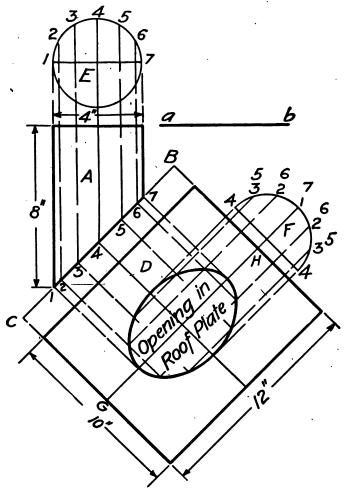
Method of Obtaining Pattern for Pipe and Opening in Roof Plate.
